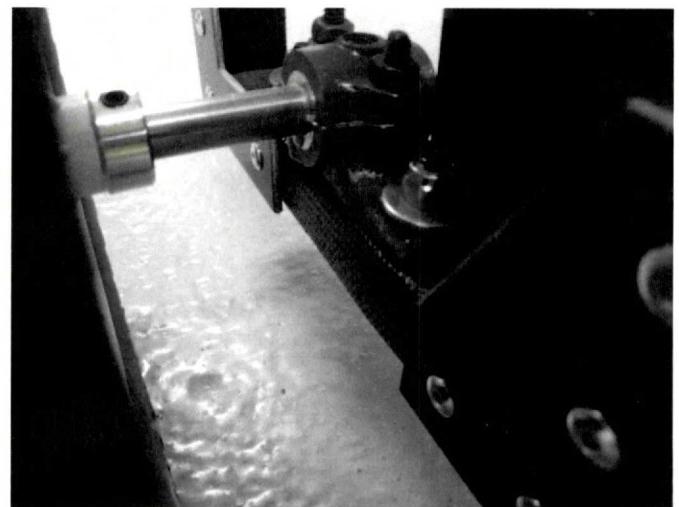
Bulging Carbon Fiber Tube at Drive Interface of Bearing Mount
